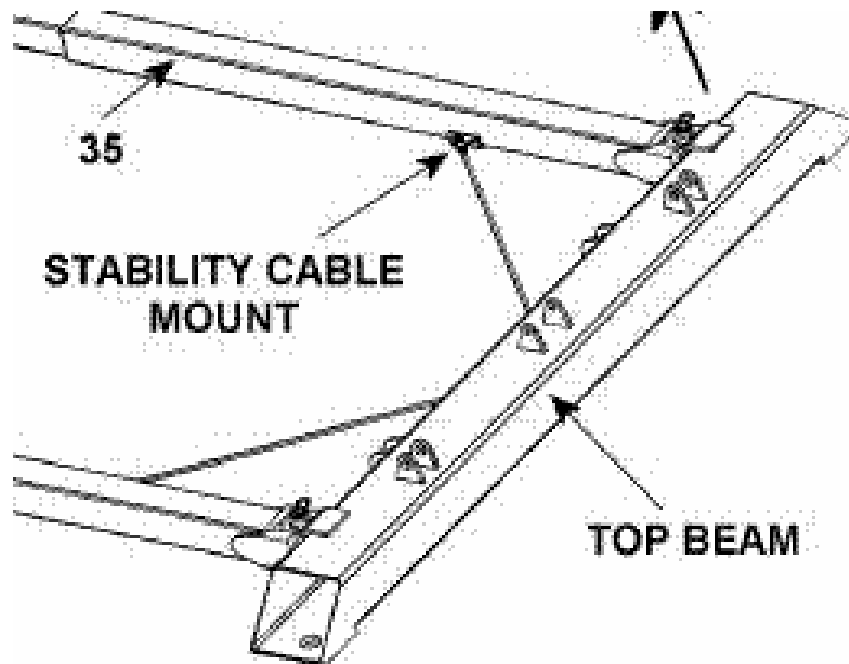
Steel cables added between the upper beam and vertical tubes
